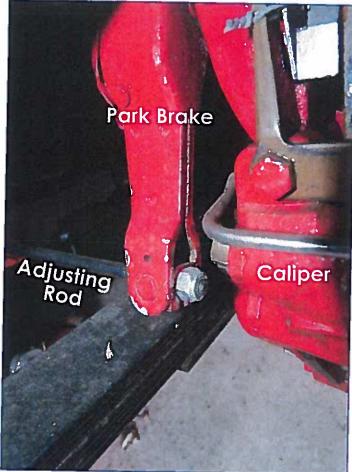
This is a close-up shot of the right side Parking Brake Adjusting Nylock Nut, which is threaded to the "open" end of the Adjusting Cross Rod. The left side would be installed similarly.
